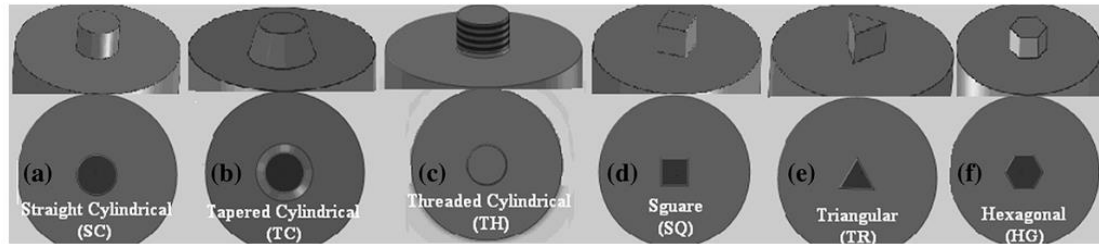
FSSW tool profile and pin size (d): (a) straight cylindrical, (b) tapered cylindrical, (c) threaded cylindrical, (d) square, (e) triangular and (f) hexagonal. [Bilici]
